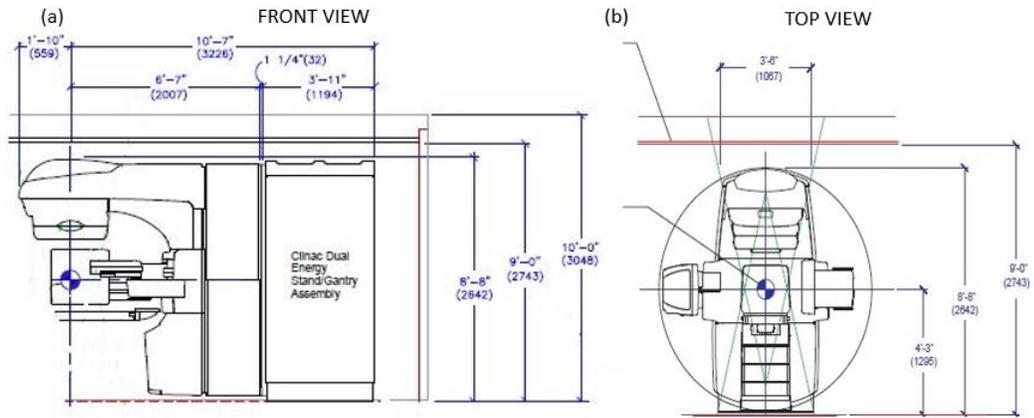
LINAC Dimensions (a) Front View, (b) Top View
